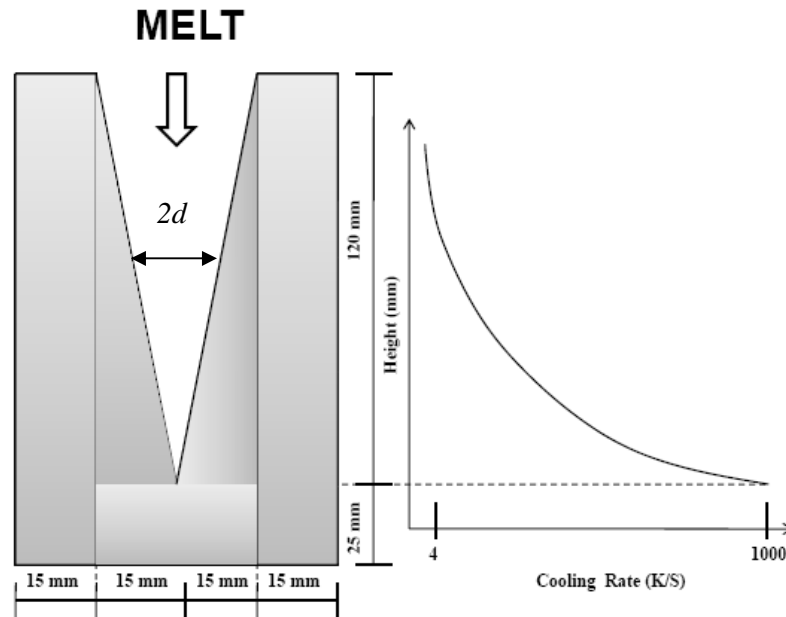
Schematic illustration of the Cu wedge mould, showing the dimensions and typical cooling rate as a function of height of the mould.
